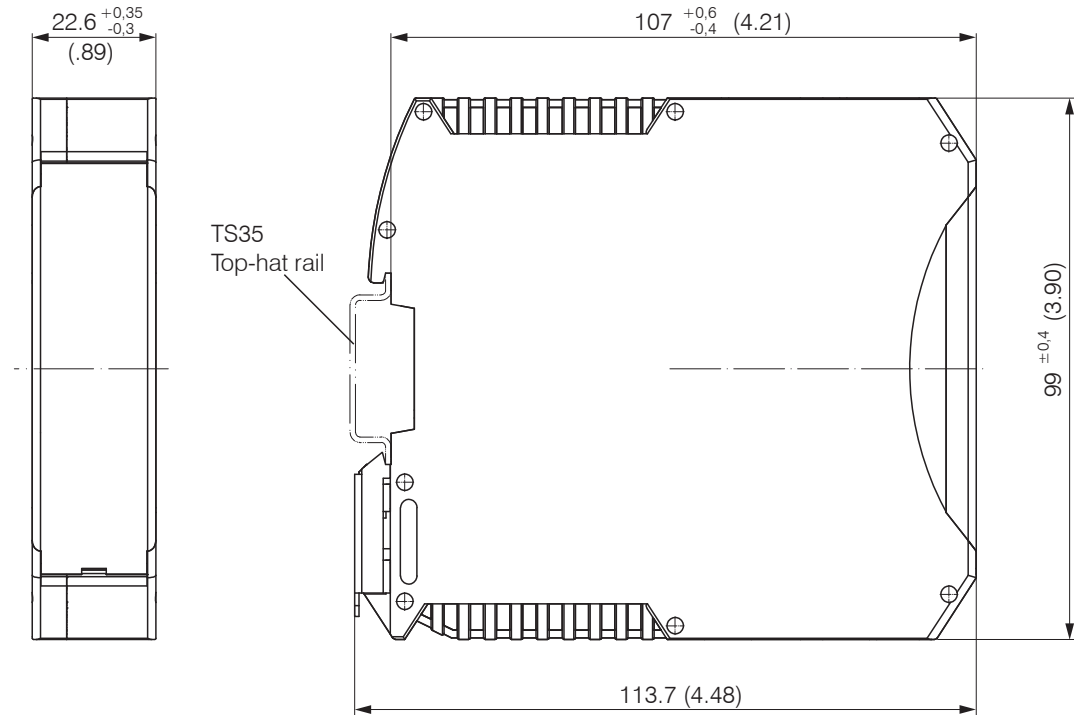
IF2030/ENETIP dimensional drawing, dimensions in mm (inches)
